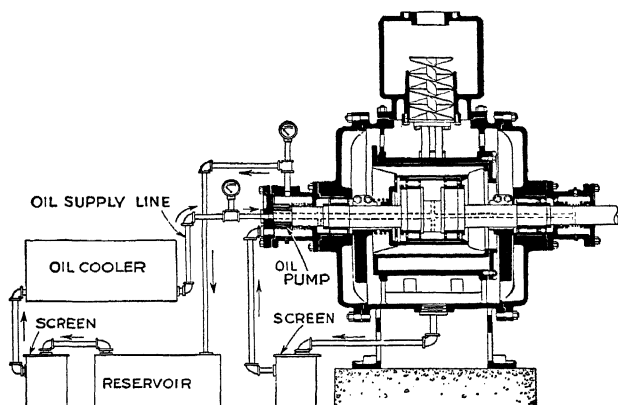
Rotary compressor with circulation oiling. (Courtesy Socony-Vacuum Oil Co.)
